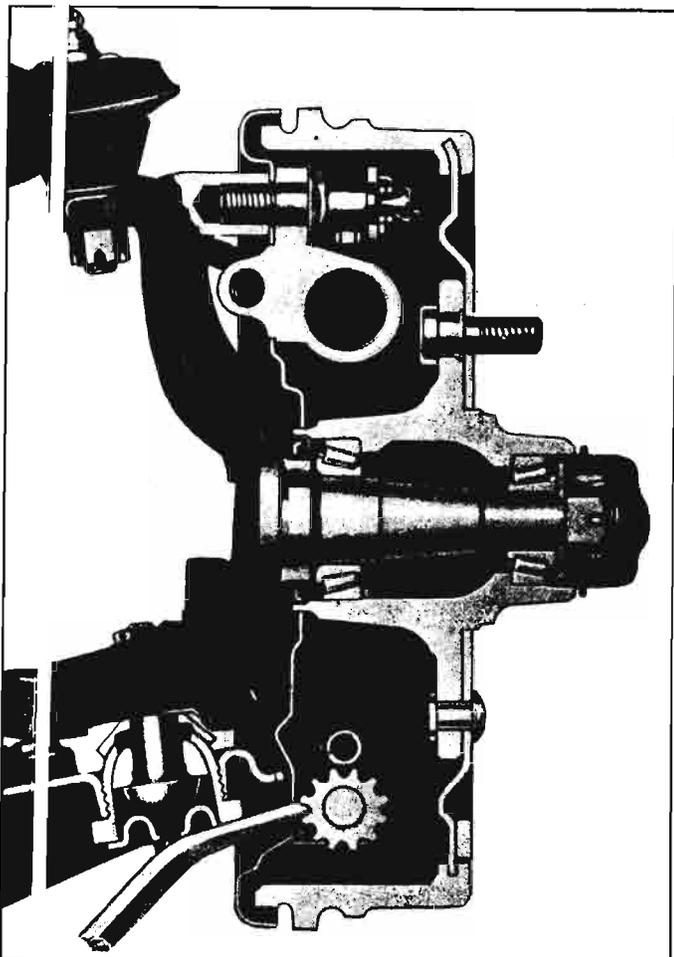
Turning Adjusting Screw Spur Wheel with Tool J-8363
